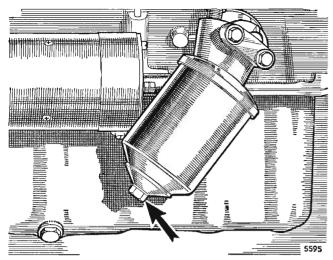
Indicated by the arrow is the centre-securing bolt for the engine oil filter
